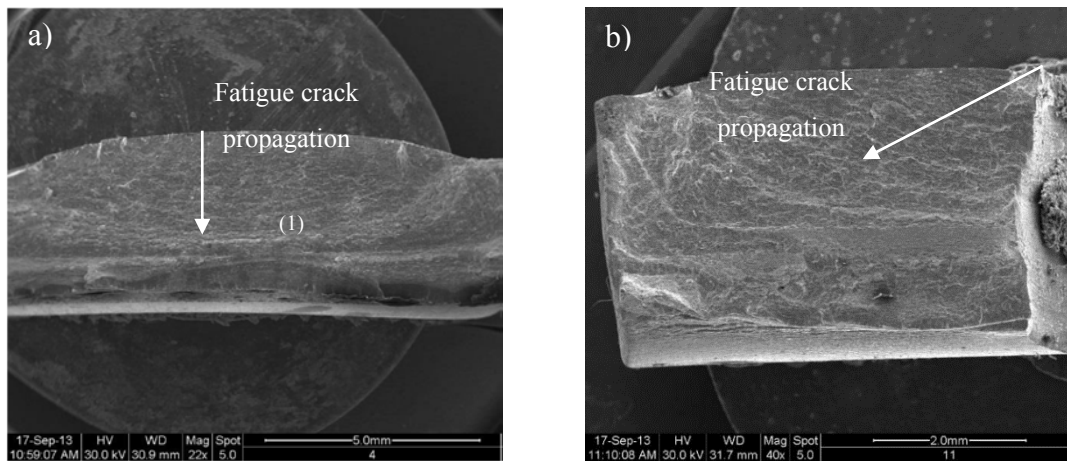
Fracture surfaces of specimens of X52 steel tested under cyclic bending: a) smooth plane specimen; b) notched plane specimen.
